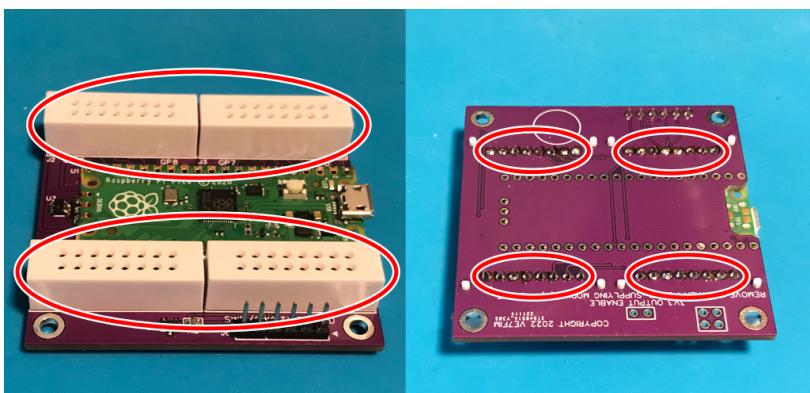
1031-0101 PCB with Pi Pico module fully soldered on.
